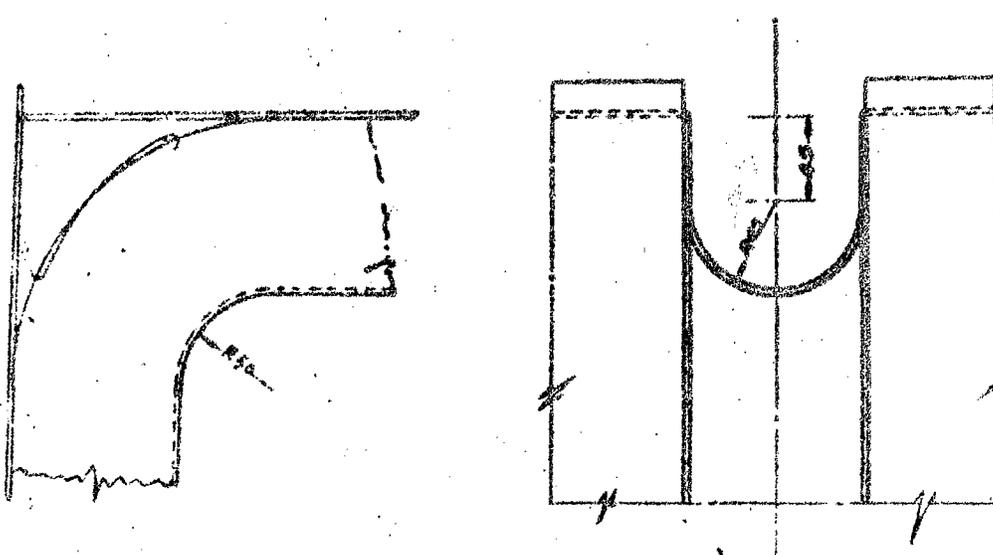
View of Elastic Joint of Deck House of Chiang-su-hao
